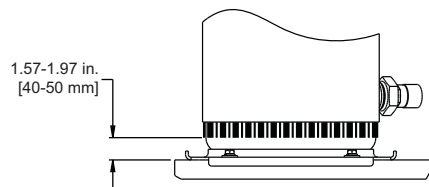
Copeland ZP295 Crankcase Heater Location
